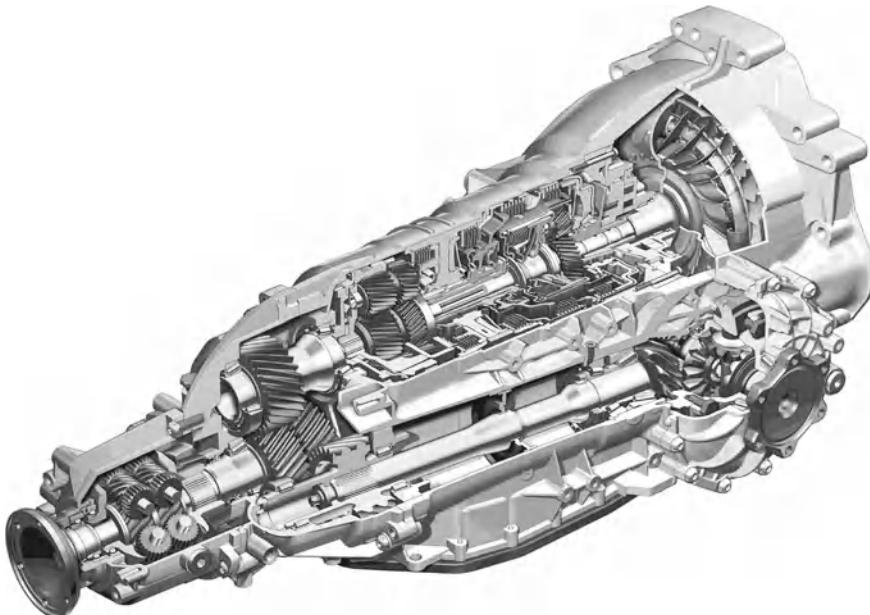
Six speed automatic gearbox with epicycloidal gear trains; the lateral shaft connects the gearbox output shaft with the differential pinion, behind the engine (courtesy of Audi)
